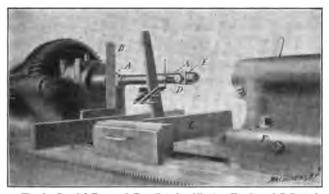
Special Form of Test Bar for Aligning Head. and Tall-stock. Plane Surfaces are used for Testing Parallelism, and Cylindrical Surfaces for Testing Concentricity
